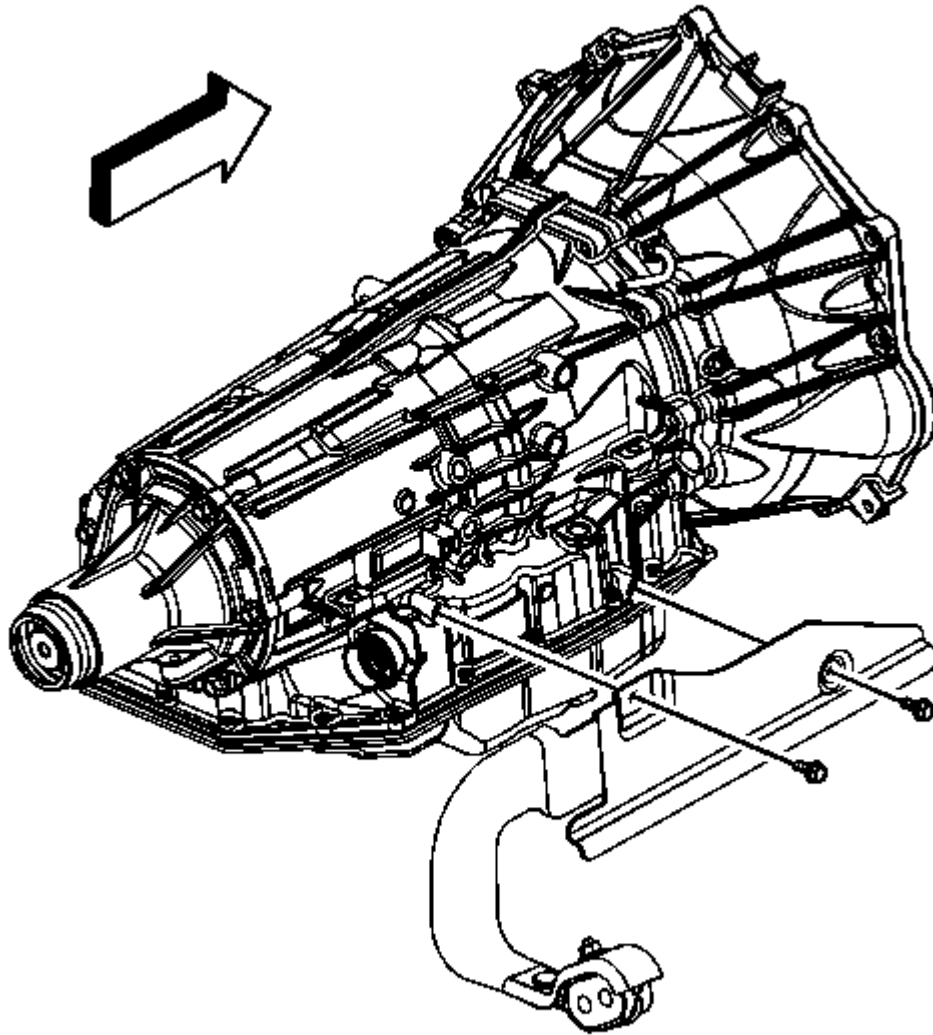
View Of 6L90-E Exhaust Pipe Hanger Bracket & Bolts
